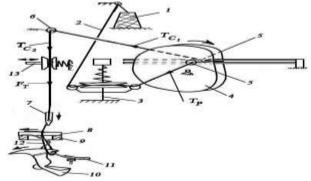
The process of cutting the upper thread loop with the upper thread take-up in the patented two-thread chain stitch, when the upper thread is braked by the brake device and when the thread take-up starts to shorten the upper thread loop at 2000
